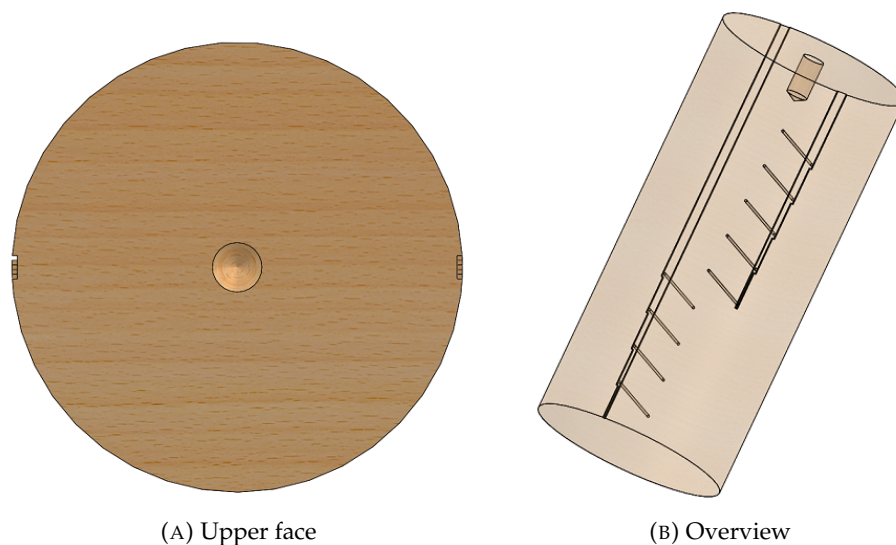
Drawing of the sample preparation : thermocouple holes and tracks, tapped hole for the screw to hang the sample
